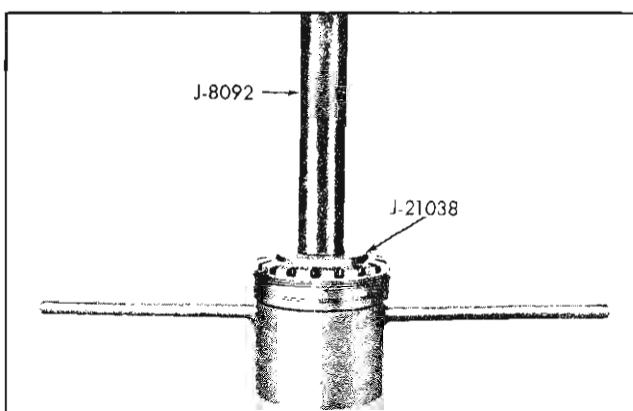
Removing Front Pinion Bearing Outer Race (Automatic)
